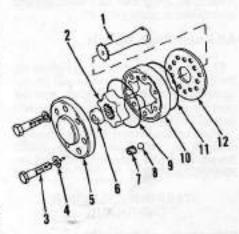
Exploded view showing steering valve rotor set, drive shalt and related parts.
